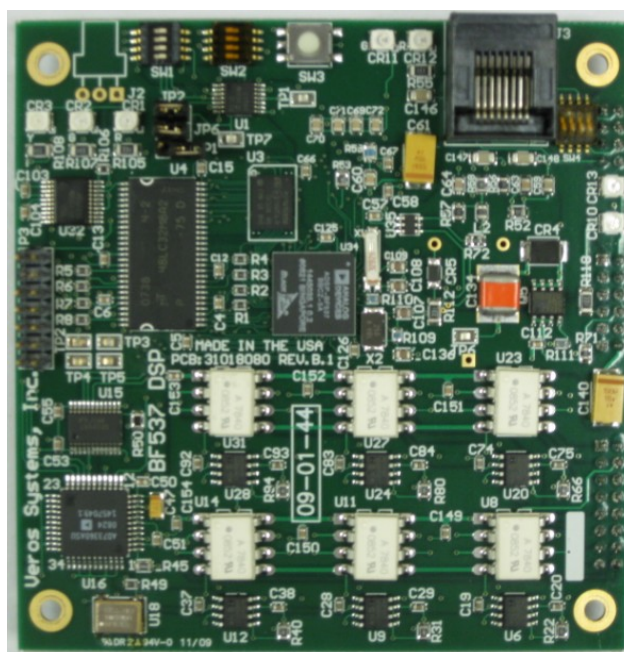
Endpoint PCB with Blackfin-BF537 and AD73360
